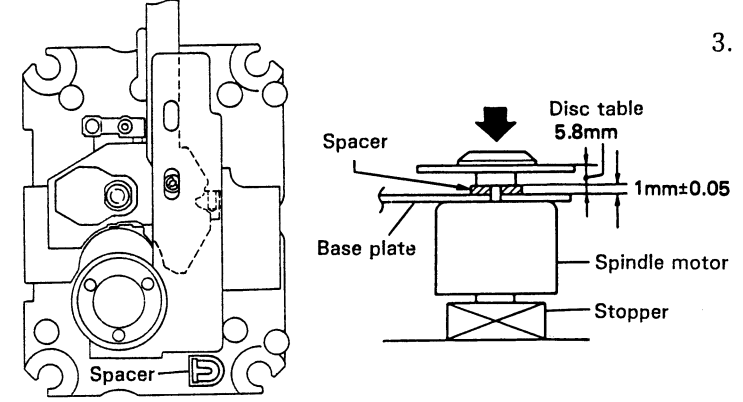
Parts disassembly (Servo mechanism assembly)
